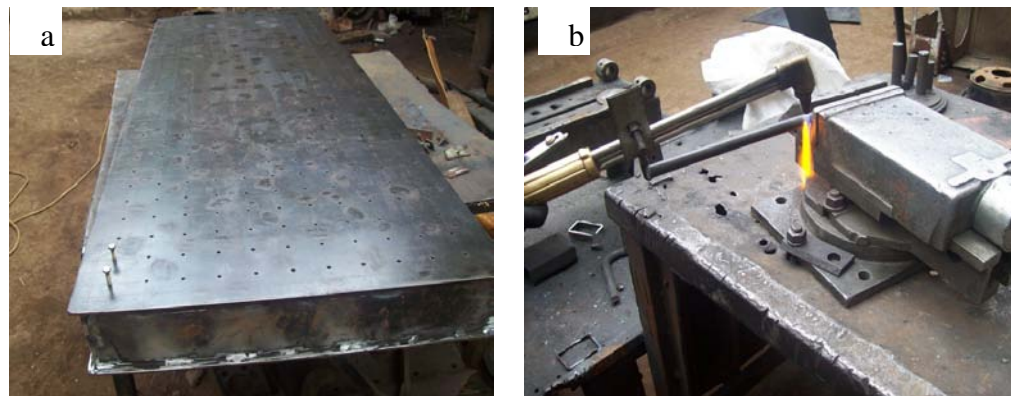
Testing top plate with M6 screws and later making optical table handles: (a) testing of optical table with M6 screws; (b) bending of metal rode to form handles
